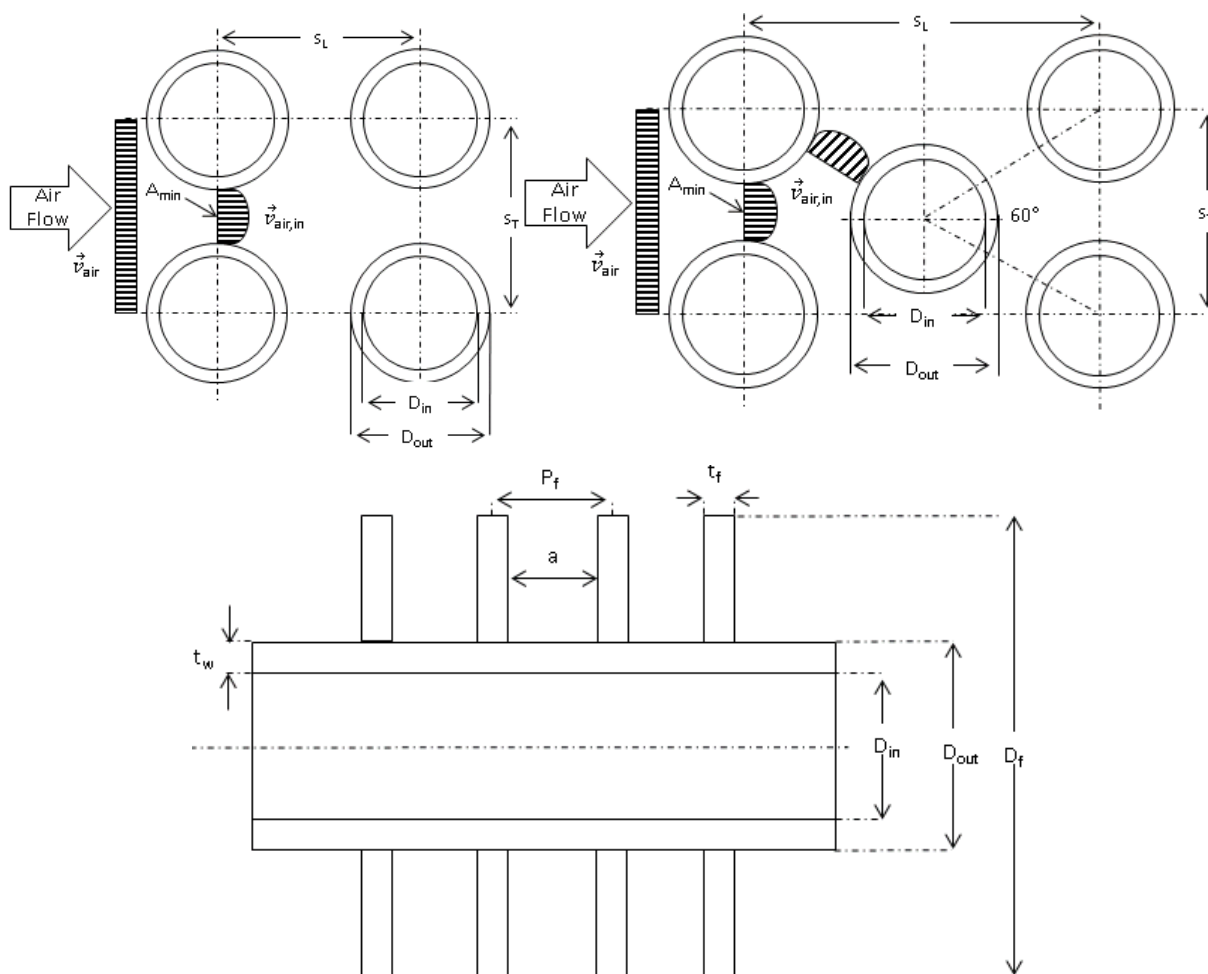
Inline (upper left) and staggered (upper right) tube layouts; fin geometry (lower center)
